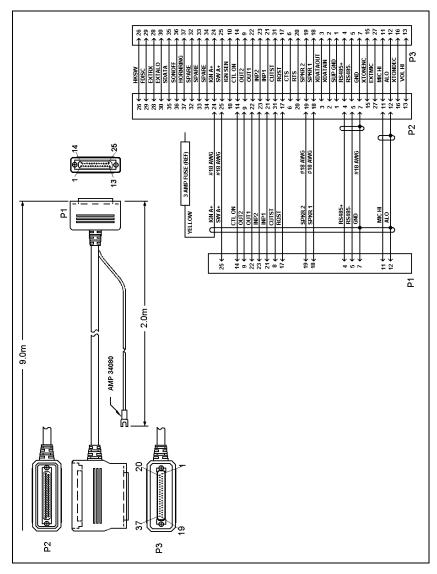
Remote Mount Dual Control Cable 19B802554P9
